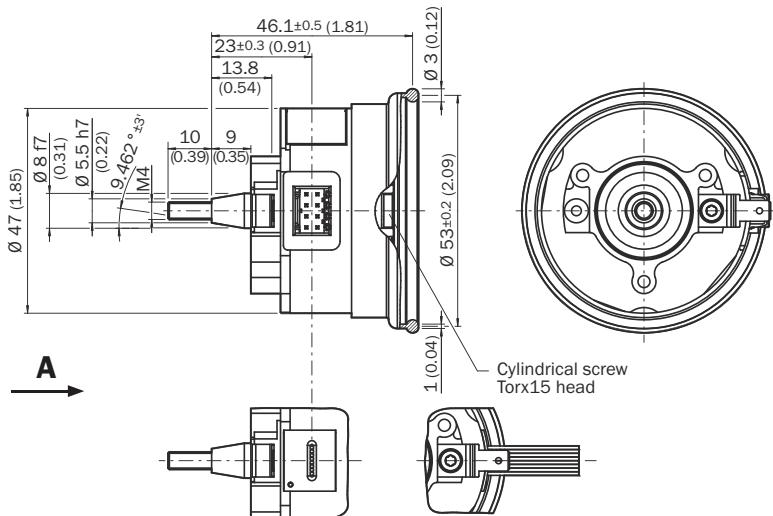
Dimensional drawing of SRS50S/SRM50S, conical shaft, rubber support
